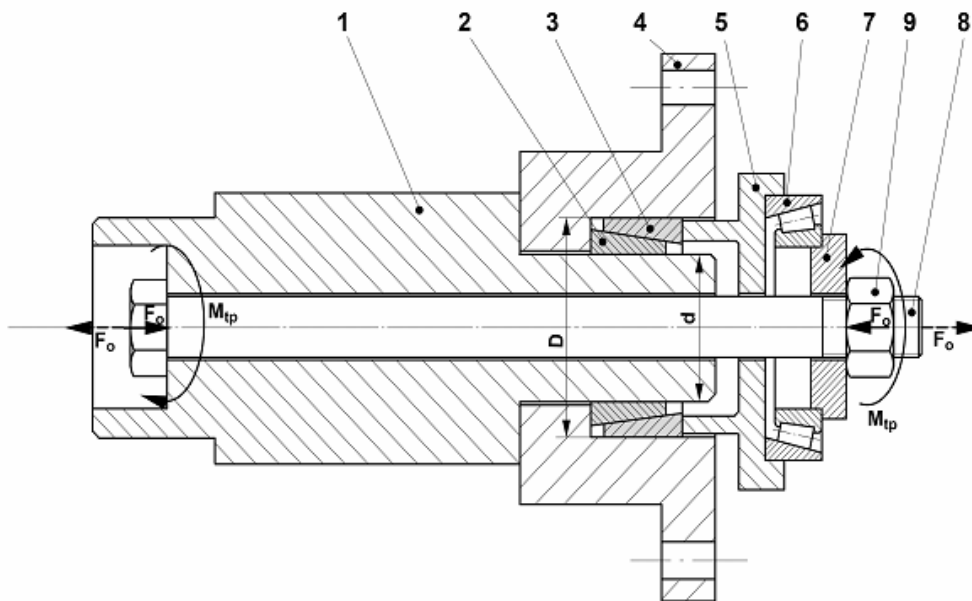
Complete structure of the tapered yielding squeeze assembly, used for the experiment.
